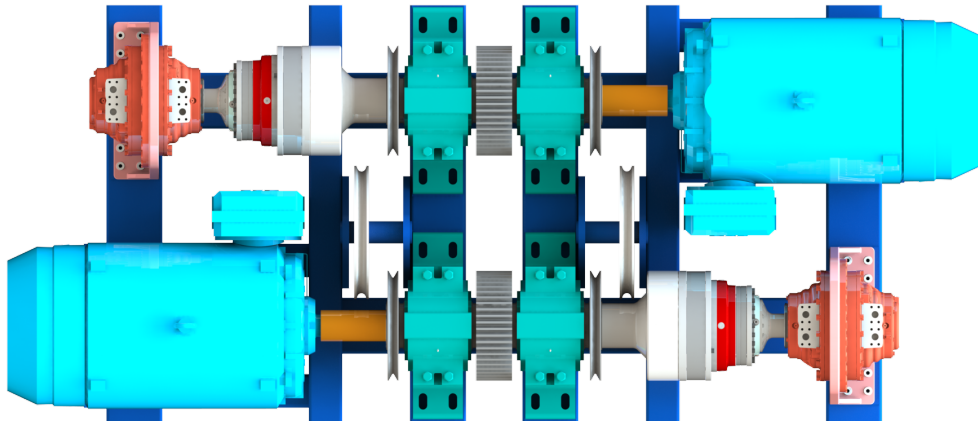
Two drive train units with generator and hydraulic motor, facing each other.
